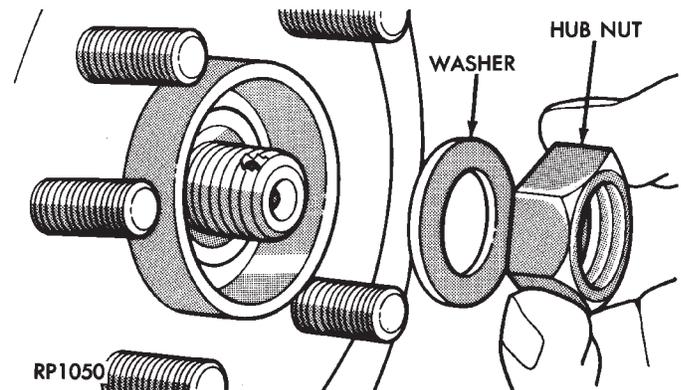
Remove Hub Nut & Washer Loosen Shaft
